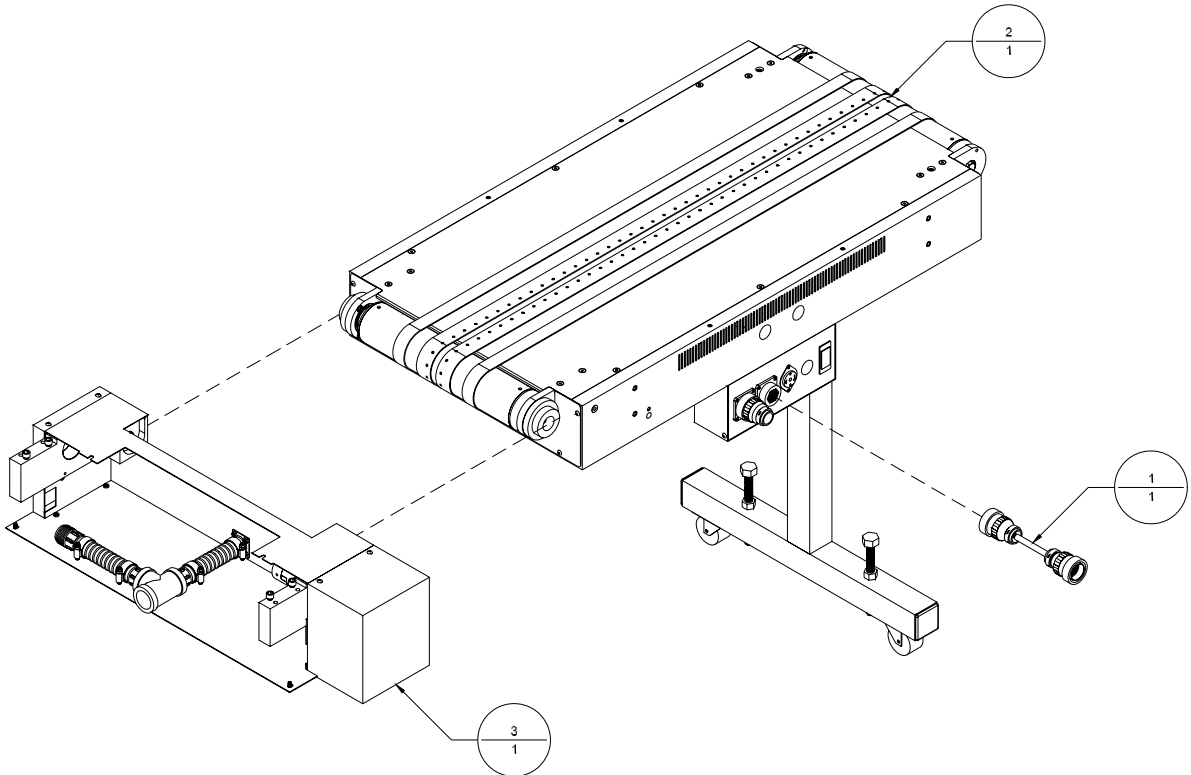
Vacuum Extension Table - BK7IB (BK703-7IBL)
